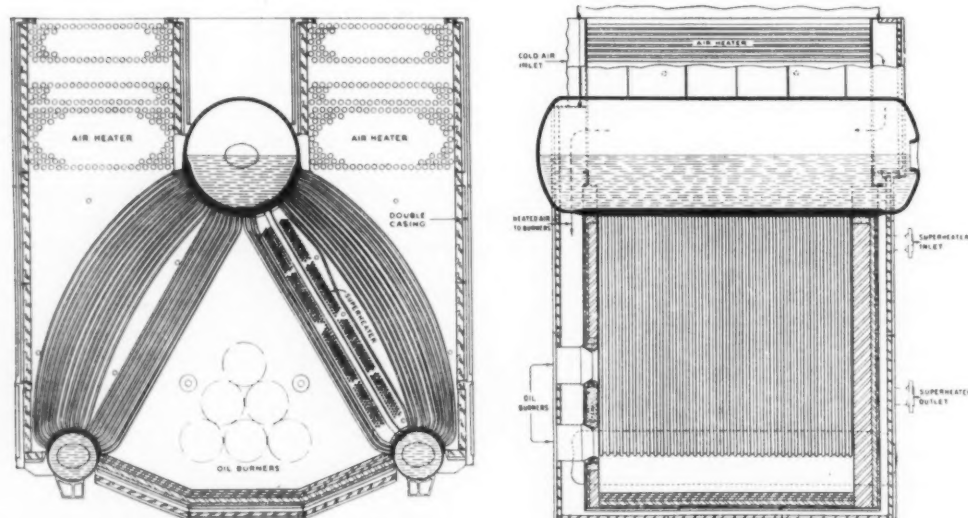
FRONT-VIEW AND LONGITUDINAL SECTIONS OF THREE-DRUM BOILER WITH SUPERHEATER AND AIR HEATER
